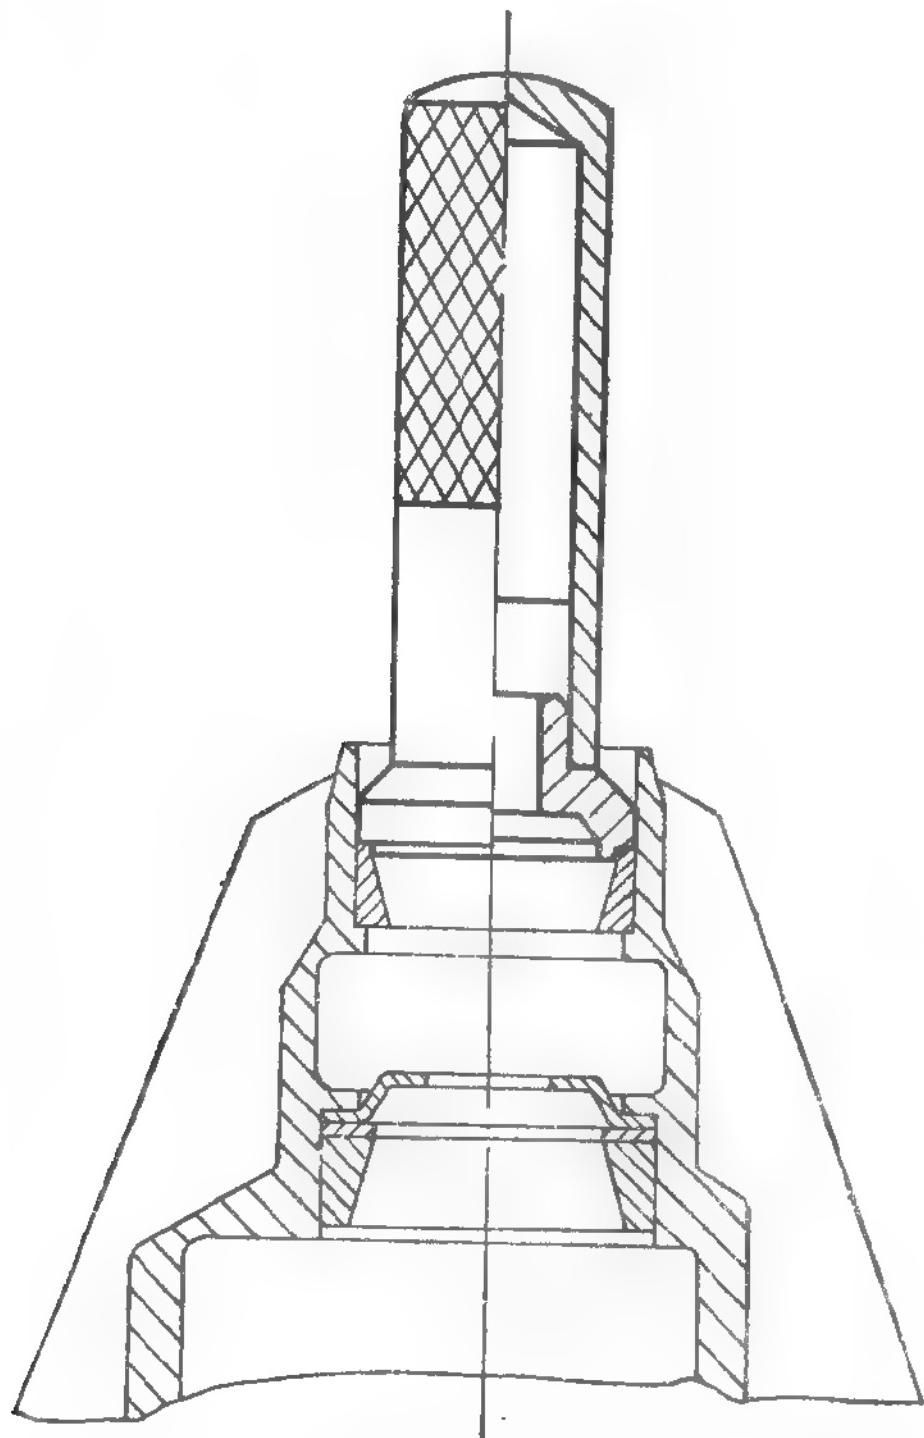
MOUNTING DRIVE PINION OUTER BEARING OUTER RACE,
